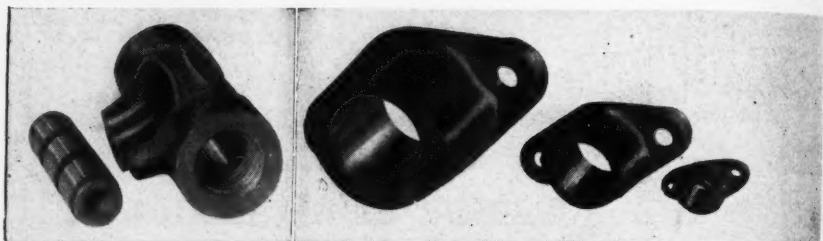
(Left) Approximately 0.004 inch of stock is removed from this hole, producing a mirror finish within 0.0002 inch limit in from two to three minutes. Fig. 9—(Right) These Morse Chain Couplings are finished within 0.00025 inch of drawing size, removing 0.004 inch of stock.
